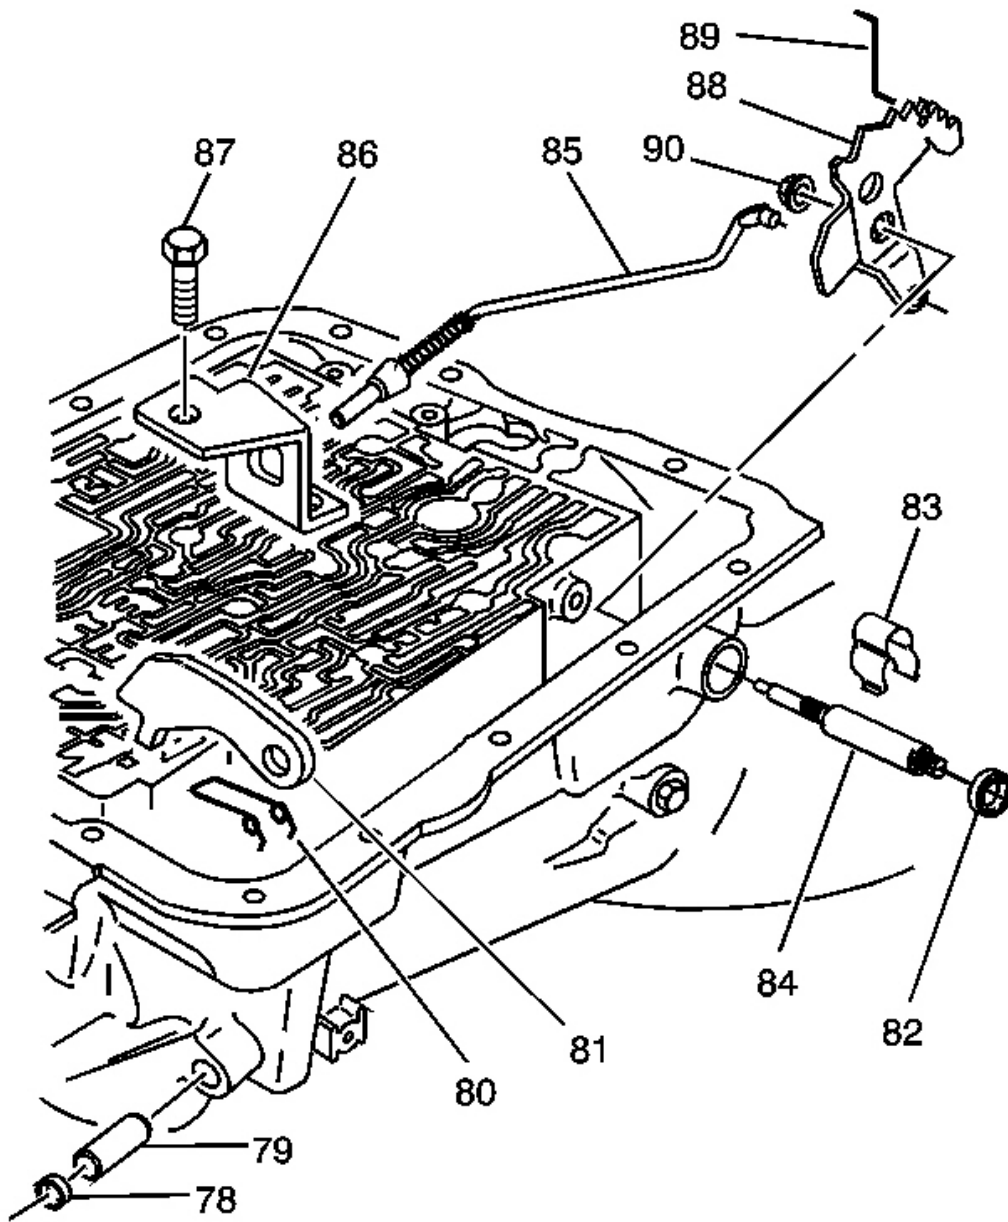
Parking Lock & Manual Shift Shaft Assembly Disassembled View
